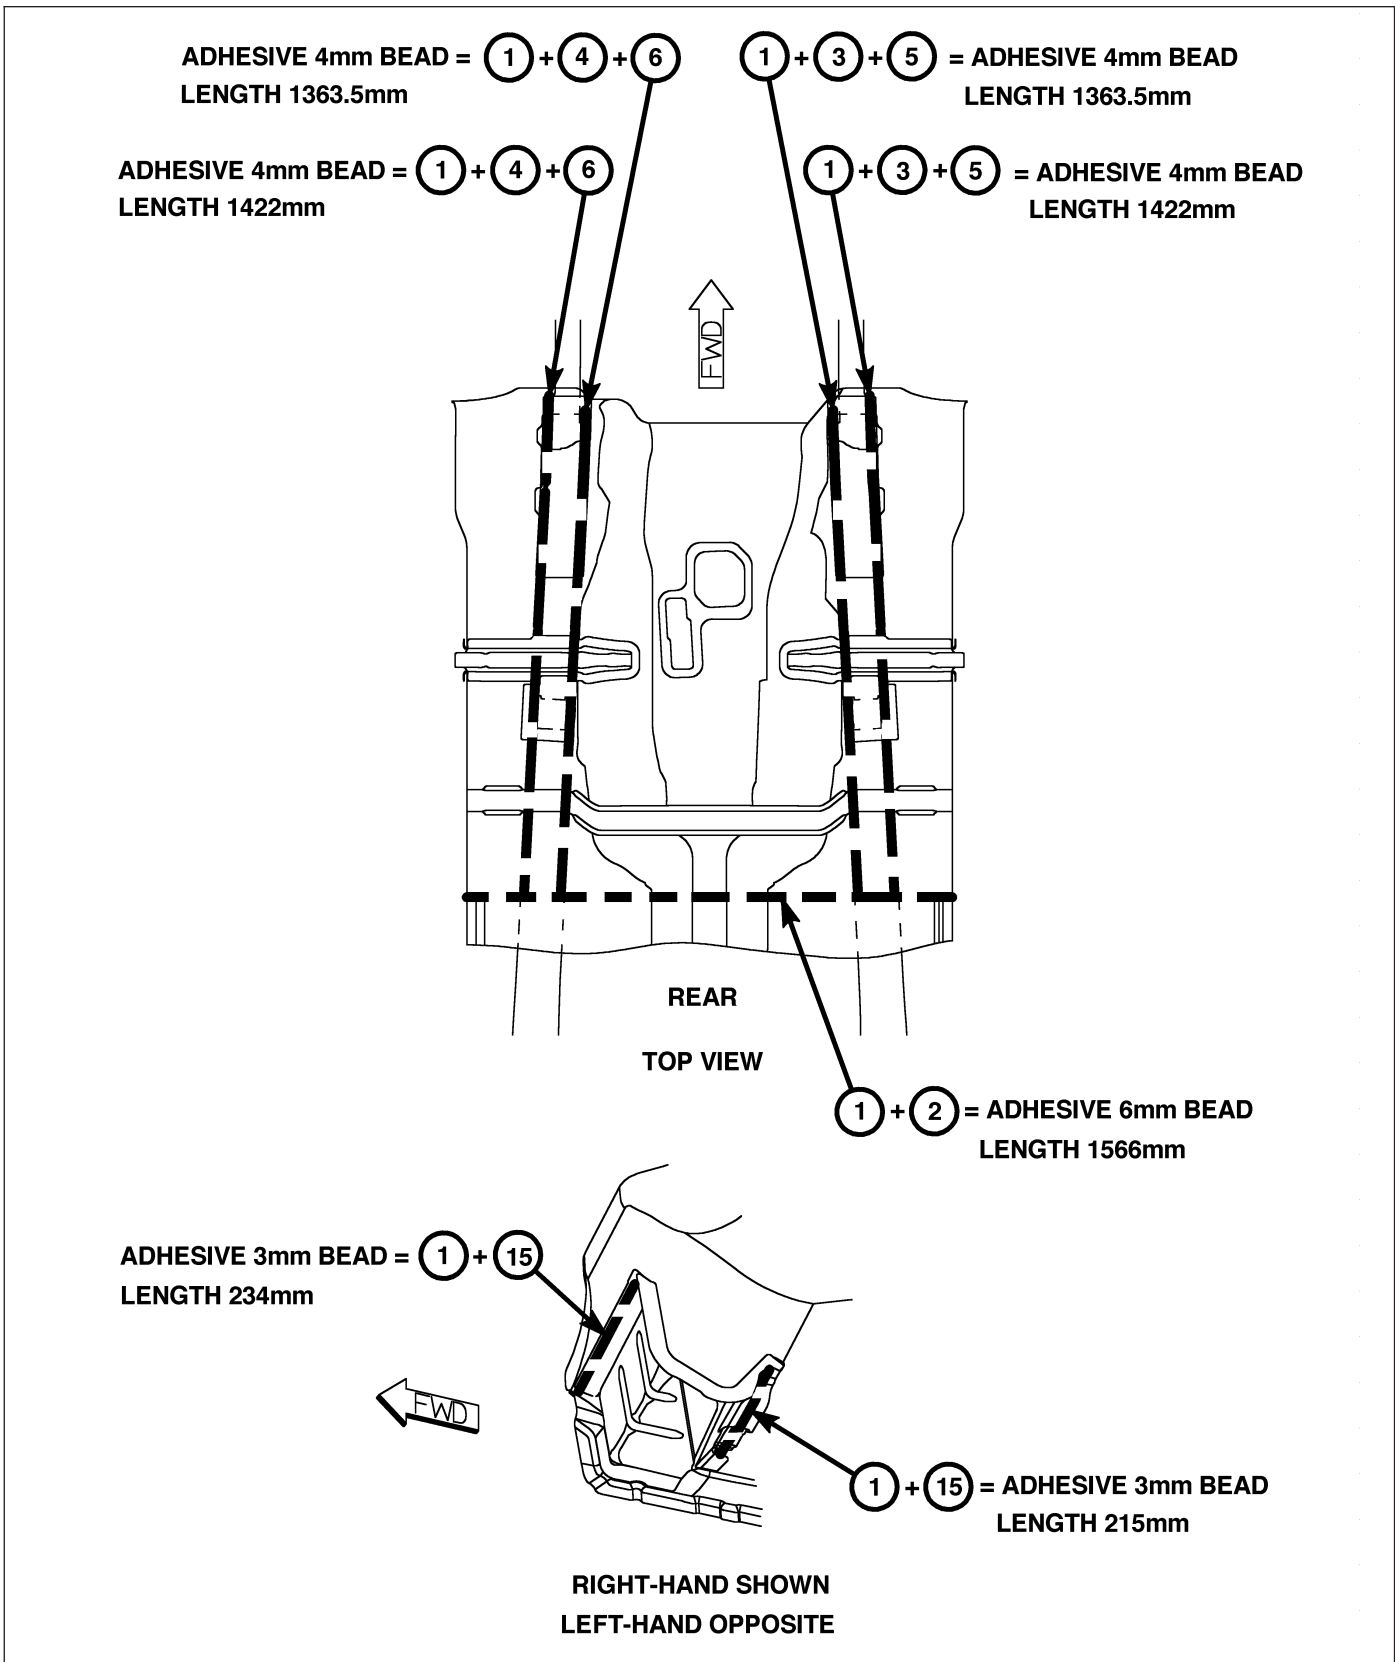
FLOOR PAN AND RAIL ASSEMBLY ADHESIVE LOCATIONS
